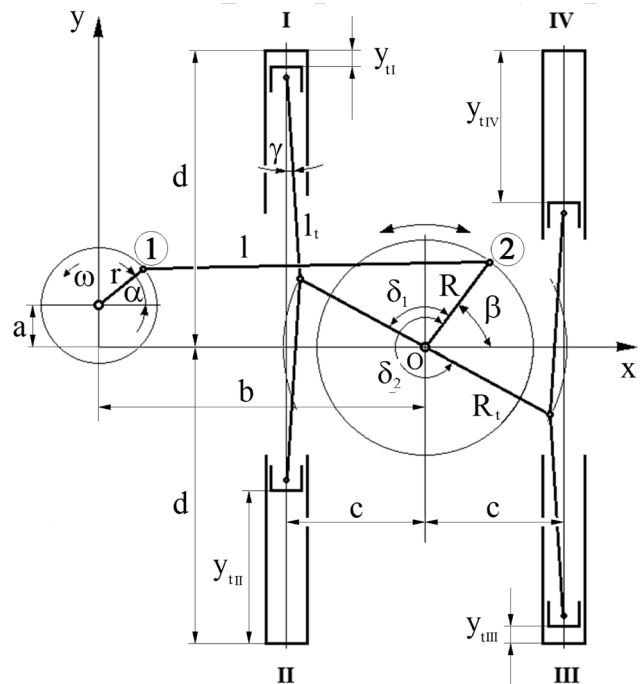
Basic design parameters of the crank and rocker piston assembly
